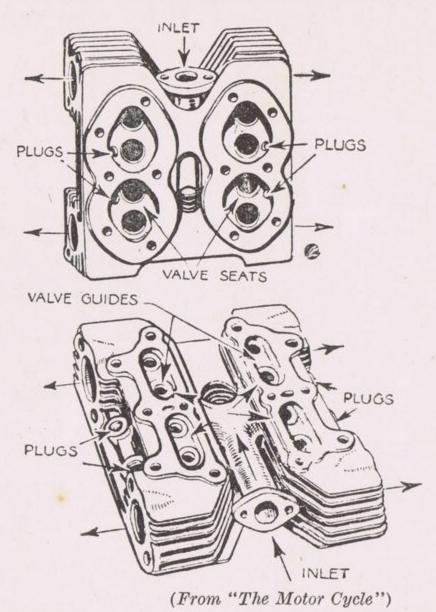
Showing the Construction of the One-piece Cylinder Head
